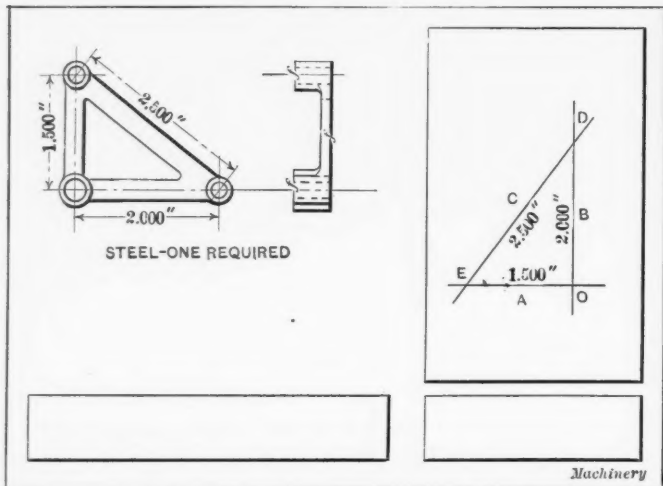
Piece to be drilled, and Jig Plate to be laid out
